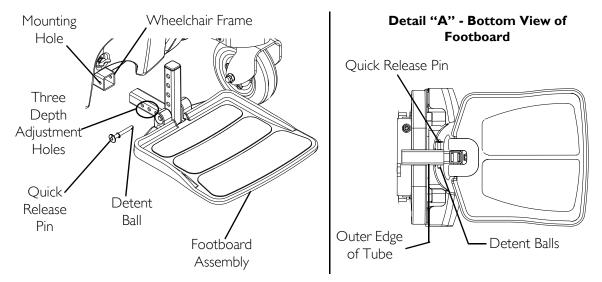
Adjusting the Footboard Assembly - Depth
